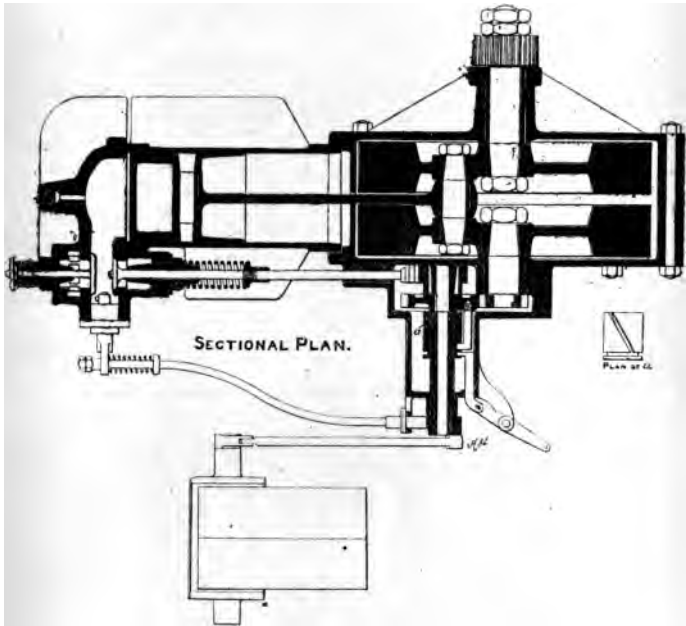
SECTIONAL PLAN THROUGH CENTRE OF THE SIMMS
